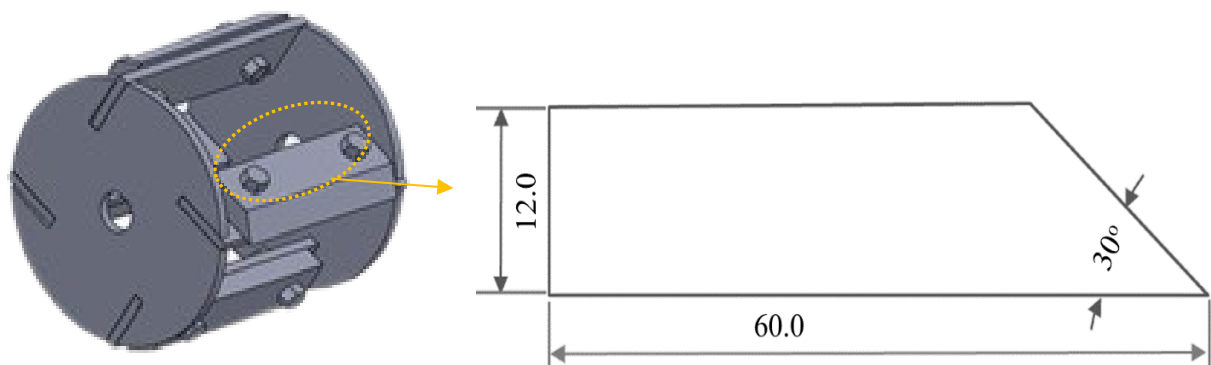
HDPE and PET plastic crusher blade design (all dimensions in mm)
